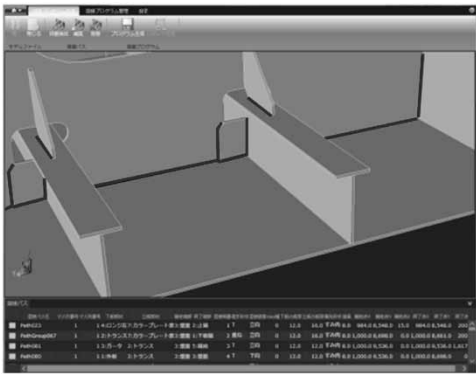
Automatic detection of welding line from 3D-CAD model
